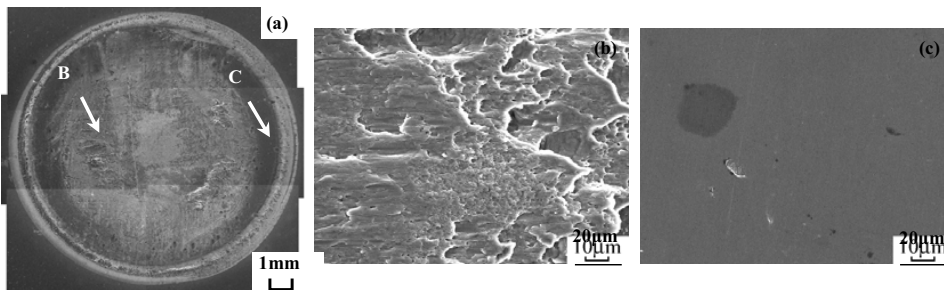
SEM micrographs showing tensile fracture surface of dissimilar weld observed on the lower steel sheet: (a) Macroscopic view, (b), (c) Magnified views at points “B” and “C” in Fig.(a), respectively. The loading direction is horizontal
